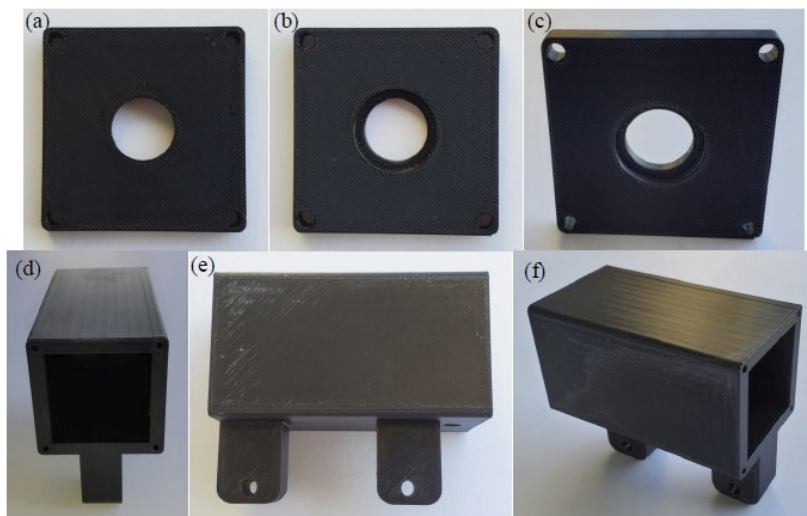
3D printed stepper motor support: (a) front view of the cap, (b) rear view of the cap, (c) different rear view of the cap, (d) front side of the box support, (e) side view of the box support, are (f) two different views of the part.
